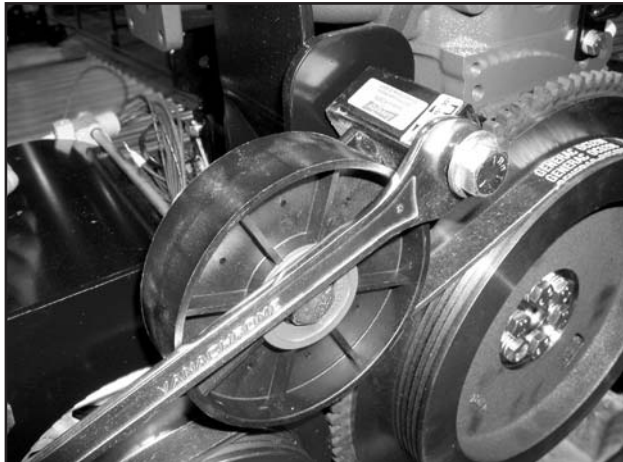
Applying Tension to Drive Belt Tensioner
